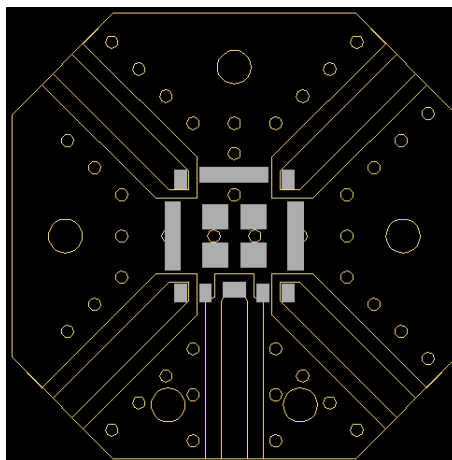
Applying the Solder Paste to the 14 points on the PCB Surface
